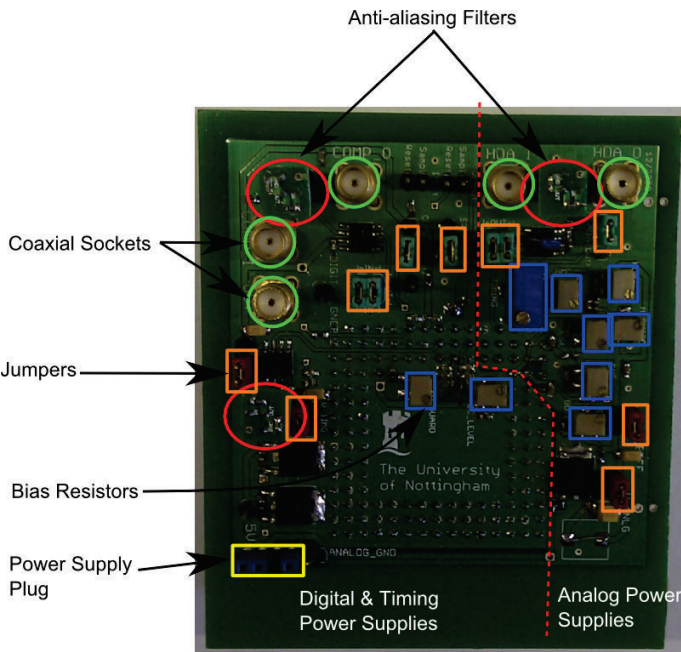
Test PCB board back showing the various interfaces and bias resistors.
